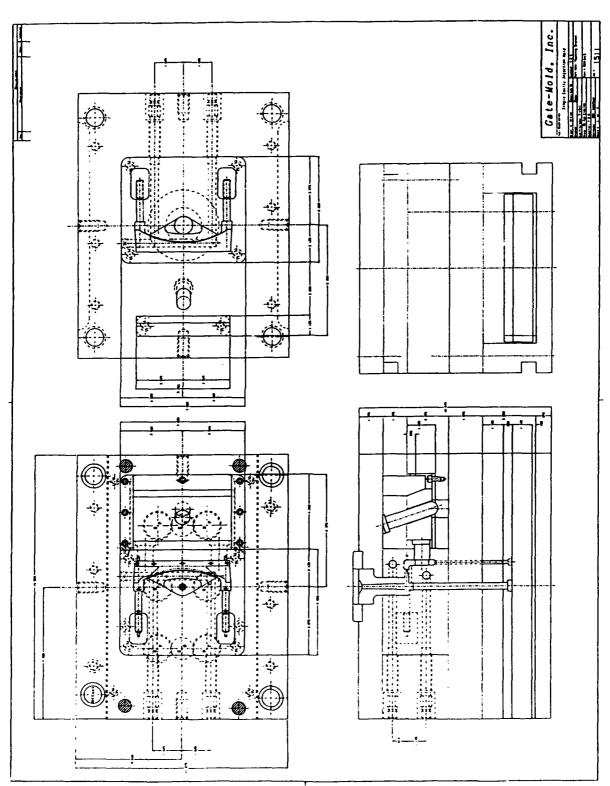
Impact modified TR-317 standard bracket mold design drawing
